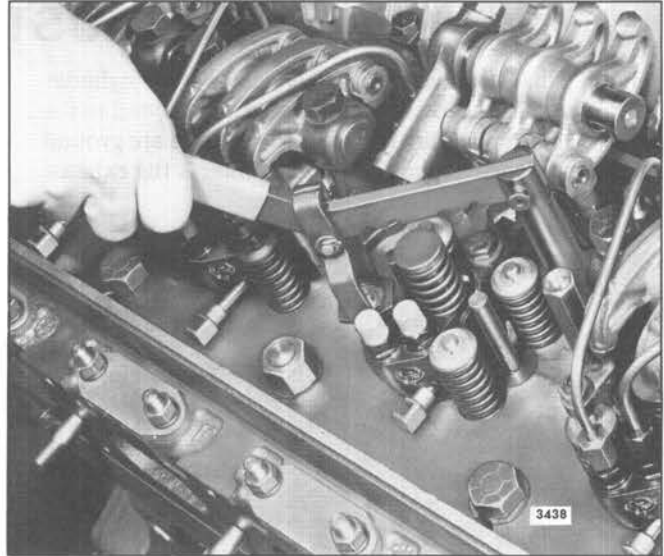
Removing Exhaust Valve Spring with Tool J 7455
